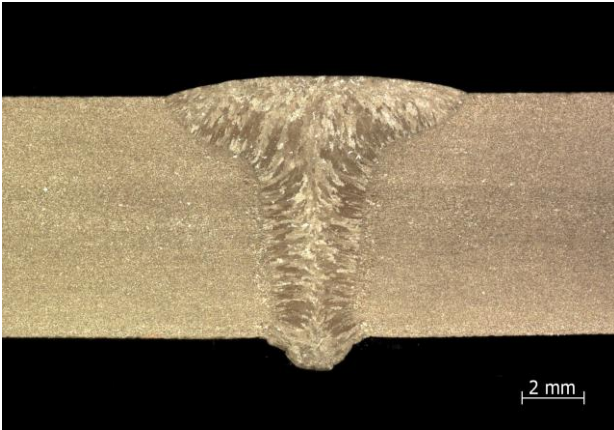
Plasma-Keyhole, Steel sheet $t = 8,0$ mm
